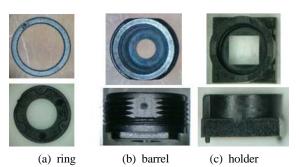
Photograph of rings, barrel, and holder of mobile phone camera module
